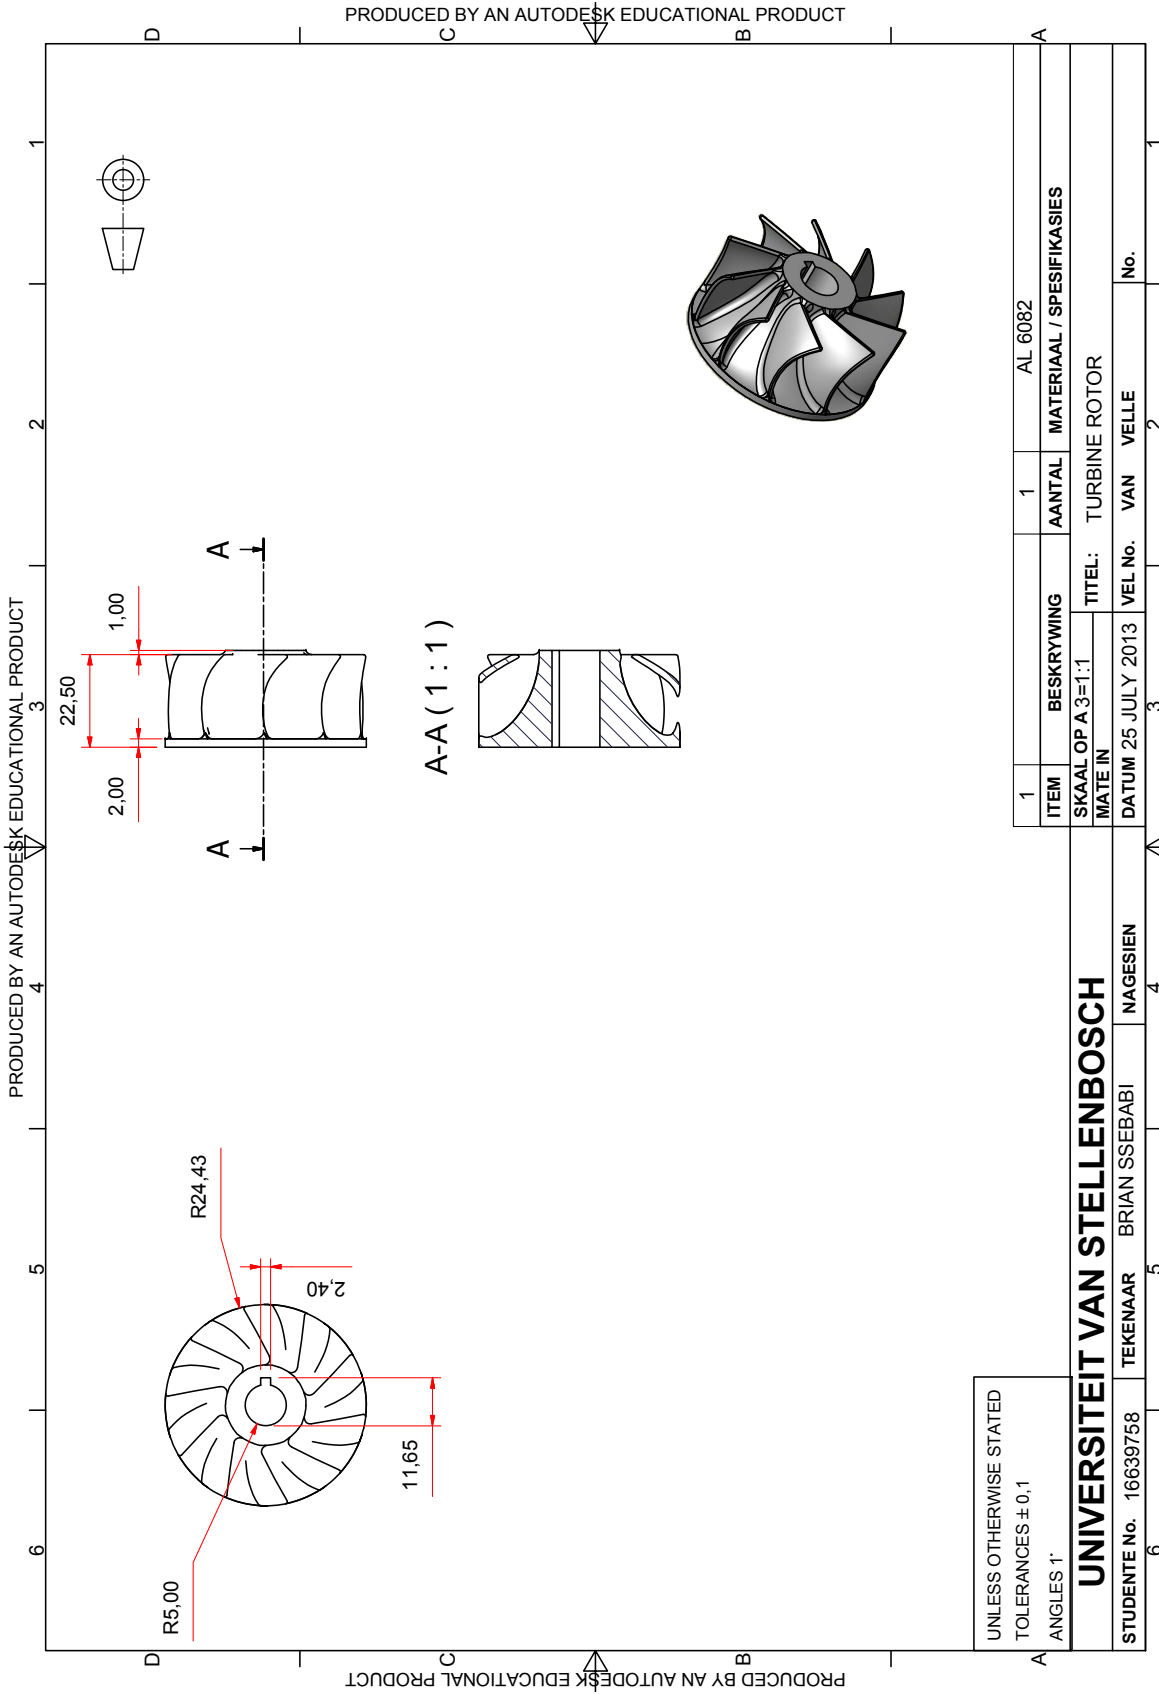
Designed turbine rotor manufacturing CAD drawing
